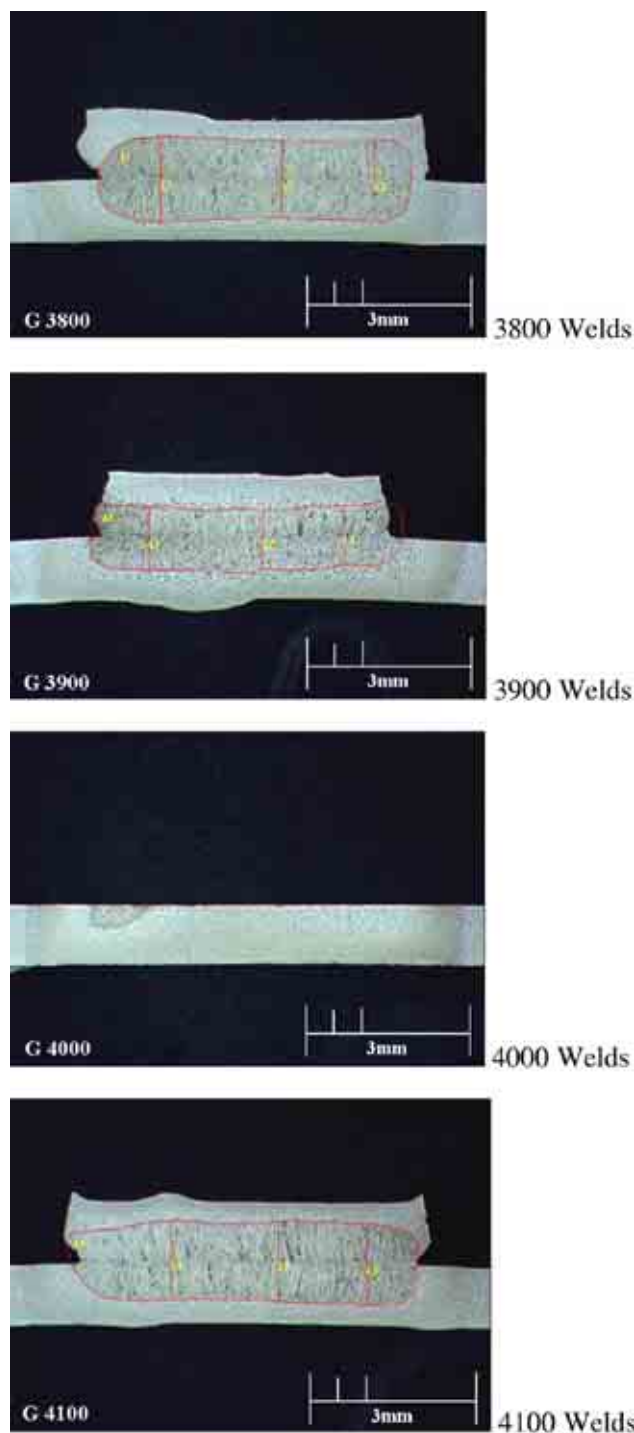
Weld button cross sections from welds 3800, 3900, 4000, and 4100 from stepper test (GM WS 5A) with internally finned electrodes on 1.1-mm 70/70 HDG 350-MPa high-strength steel. Nugget penetration decreases before button failure.
